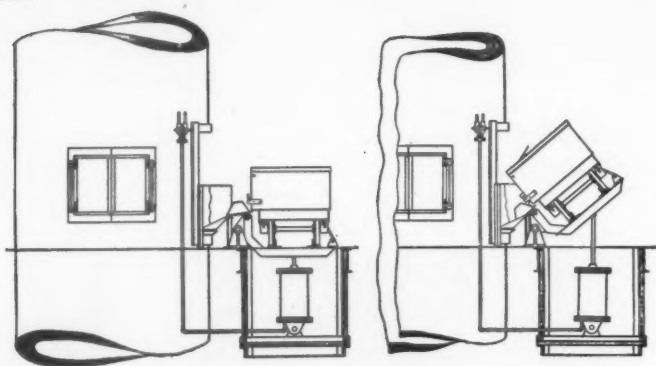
PNEUMATIC CUPOLA CHARGING MACHINE—DUMPING ONLY.
